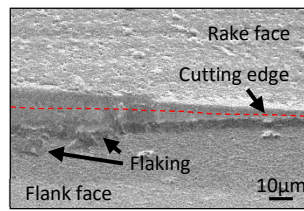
End cutting edge for Type C and cutting distance of 990 m
